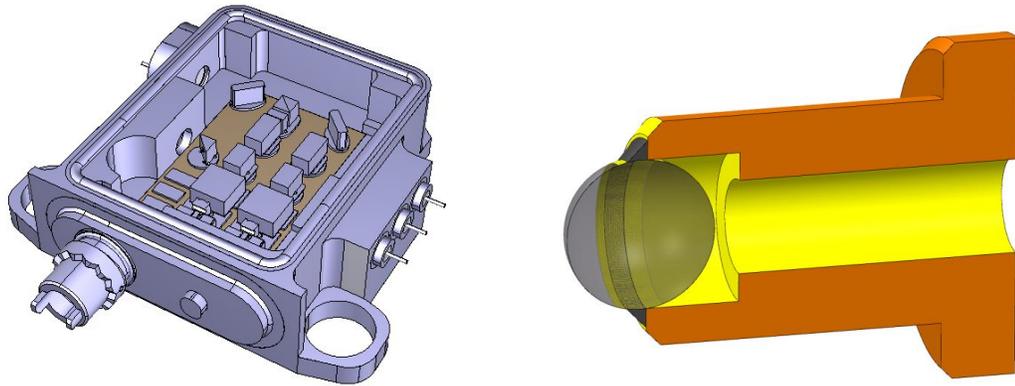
Left, design of the hermetically sealed housing by means of Solderjet technique (designs and simulations performed by LIDAX). Right, detail of the precisely assembled spherical fused silica lens into the stainless steel Mini-AVIM fiber connector, by means of cold soldering technique.
